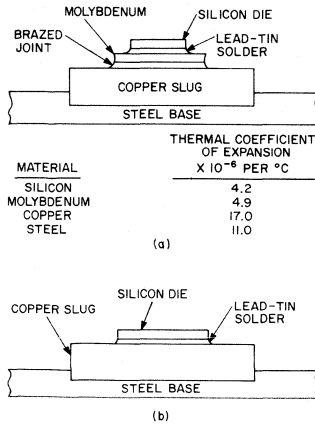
Cross section of a transistor that uses a molybdenum expansion matcher between pellet and header; (b) cross section of a transistor in which pellet is soldered directly to copper.
